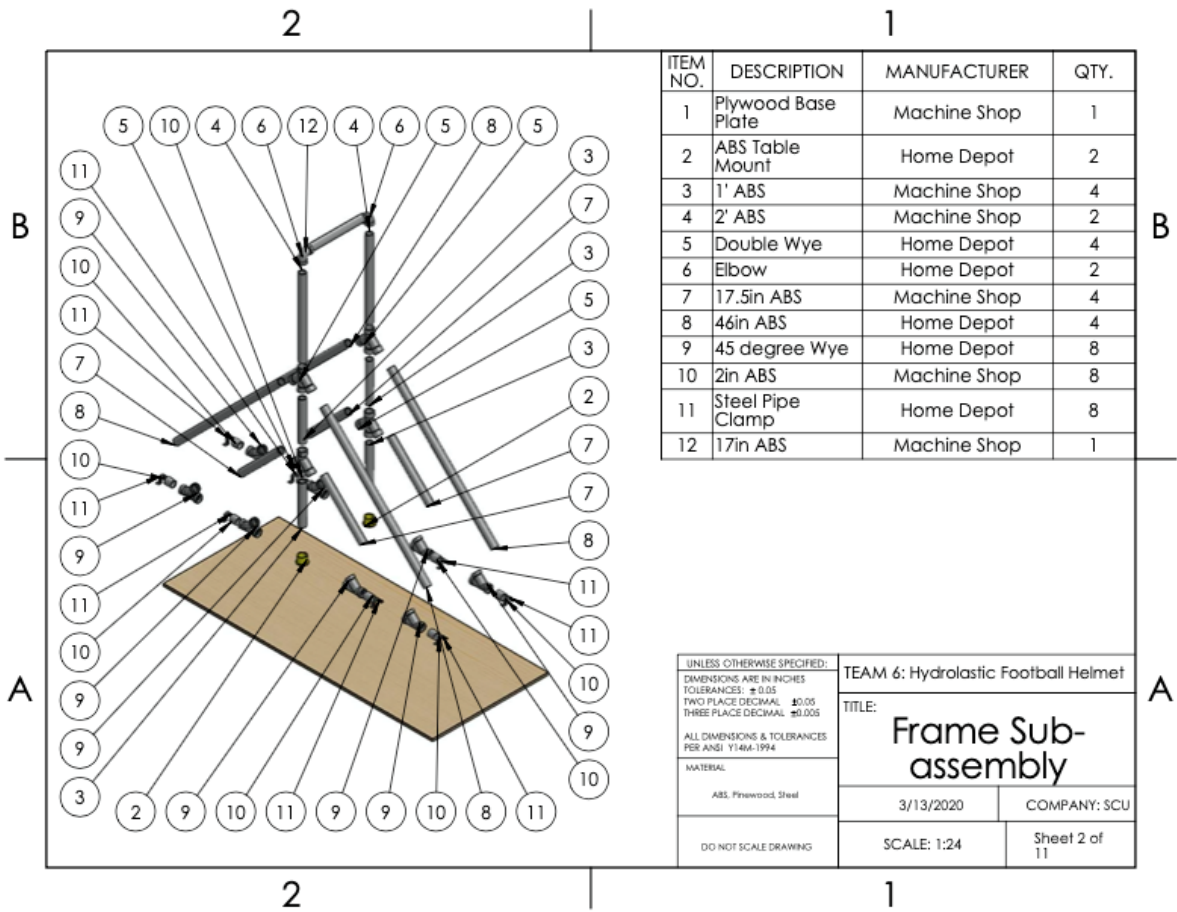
Final CAD drawing of the entire testing apparatus, broken up into pieces.
